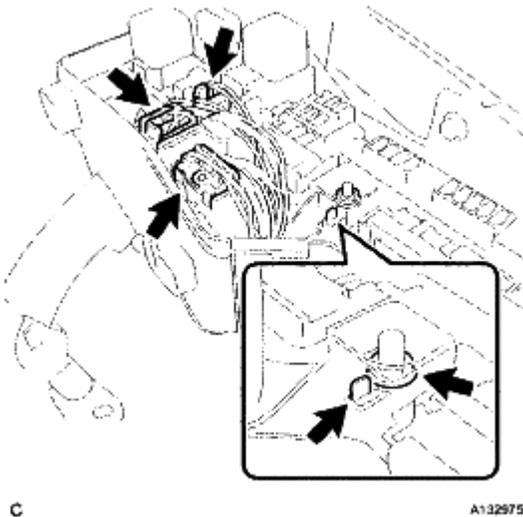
Locating Engine Wire And Engine Room Relay Block
